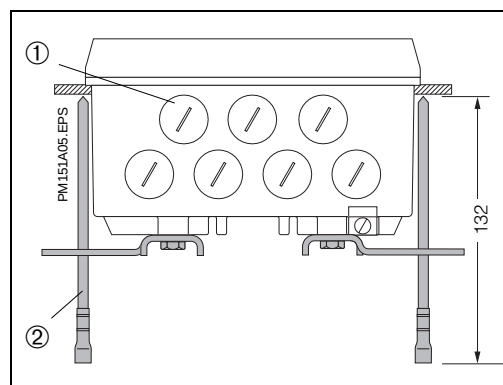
Bottom of field housing with straining screws installed for panel mounting
